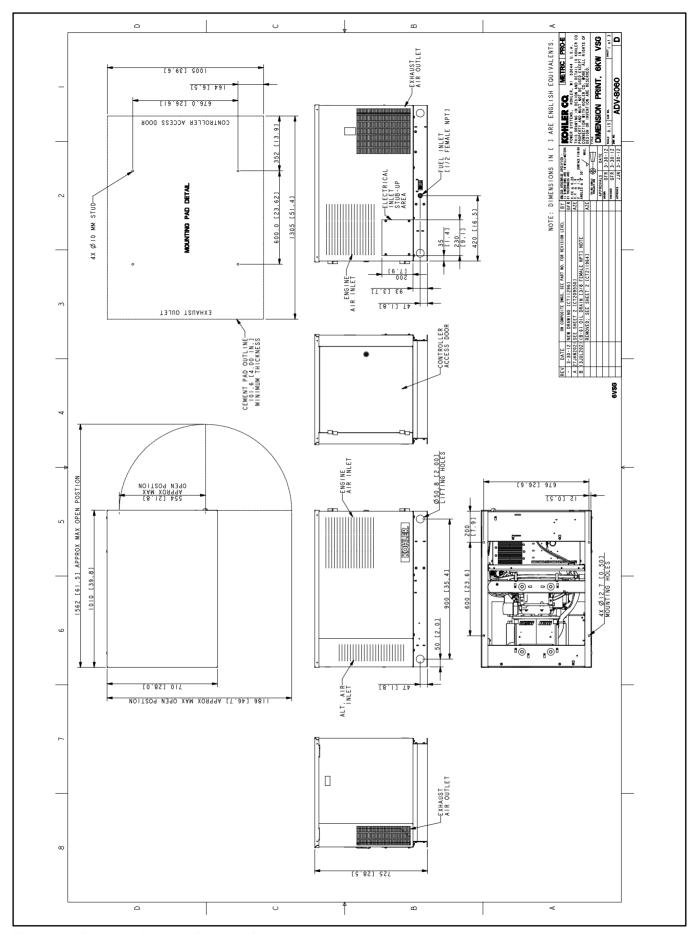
Dimension Drawing ADV-8060, Sheet 1
